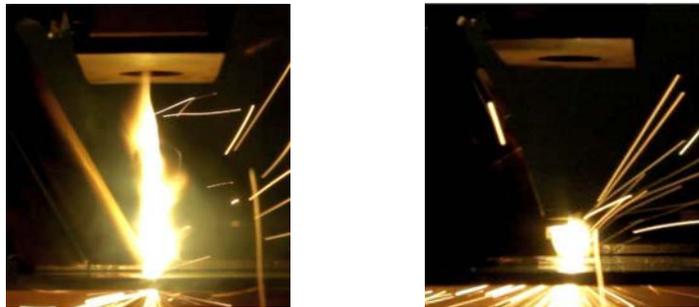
Welding of stainless steel 1.4301 with shielding gas lateral nozzle
